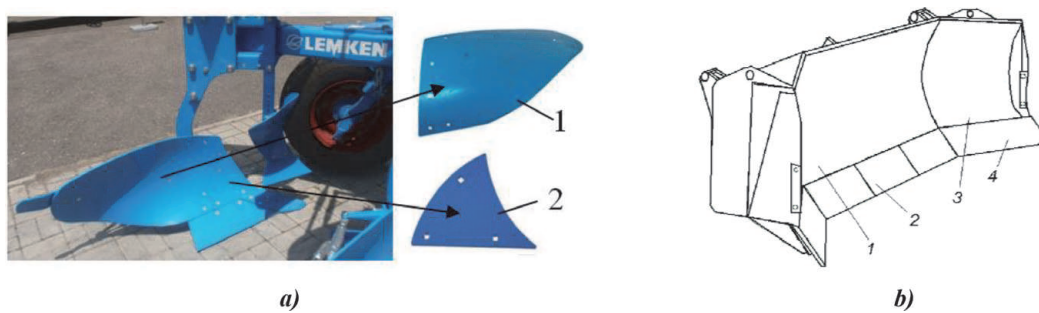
Sectional (parts) construction of plow (a) and bulldozer (b) moldboard's surface: "1-wing" and "2-breast" of plow's body; "2-frontal" and "3-side" sections of spherical moldboard of bulldozer.
